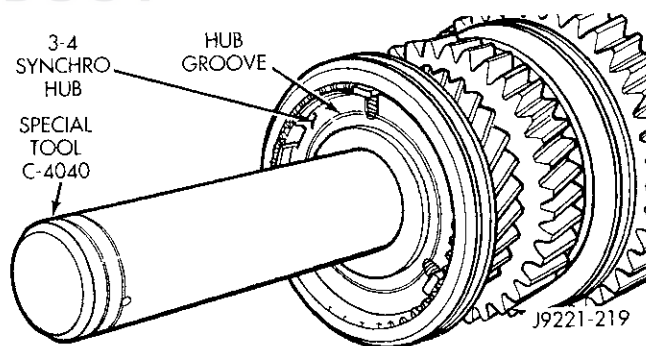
Seating 3-4 Synchro Assembly On Mainshaft
